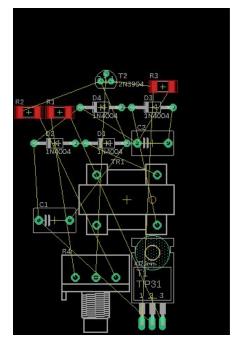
(b): Eagle CAD PCB Footprint of Power Supply
